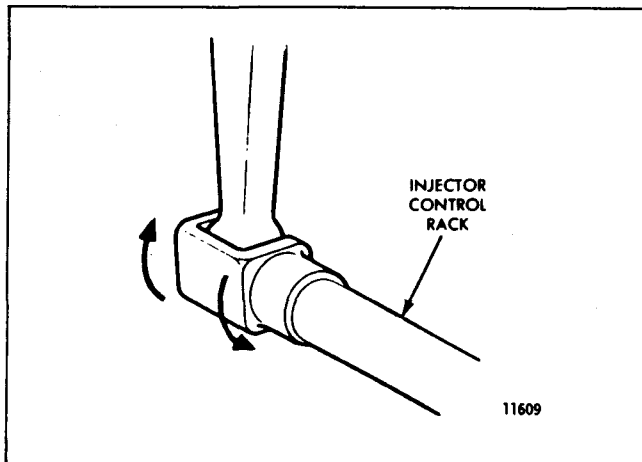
Checking Rotating Movement of Injector Control Rack
